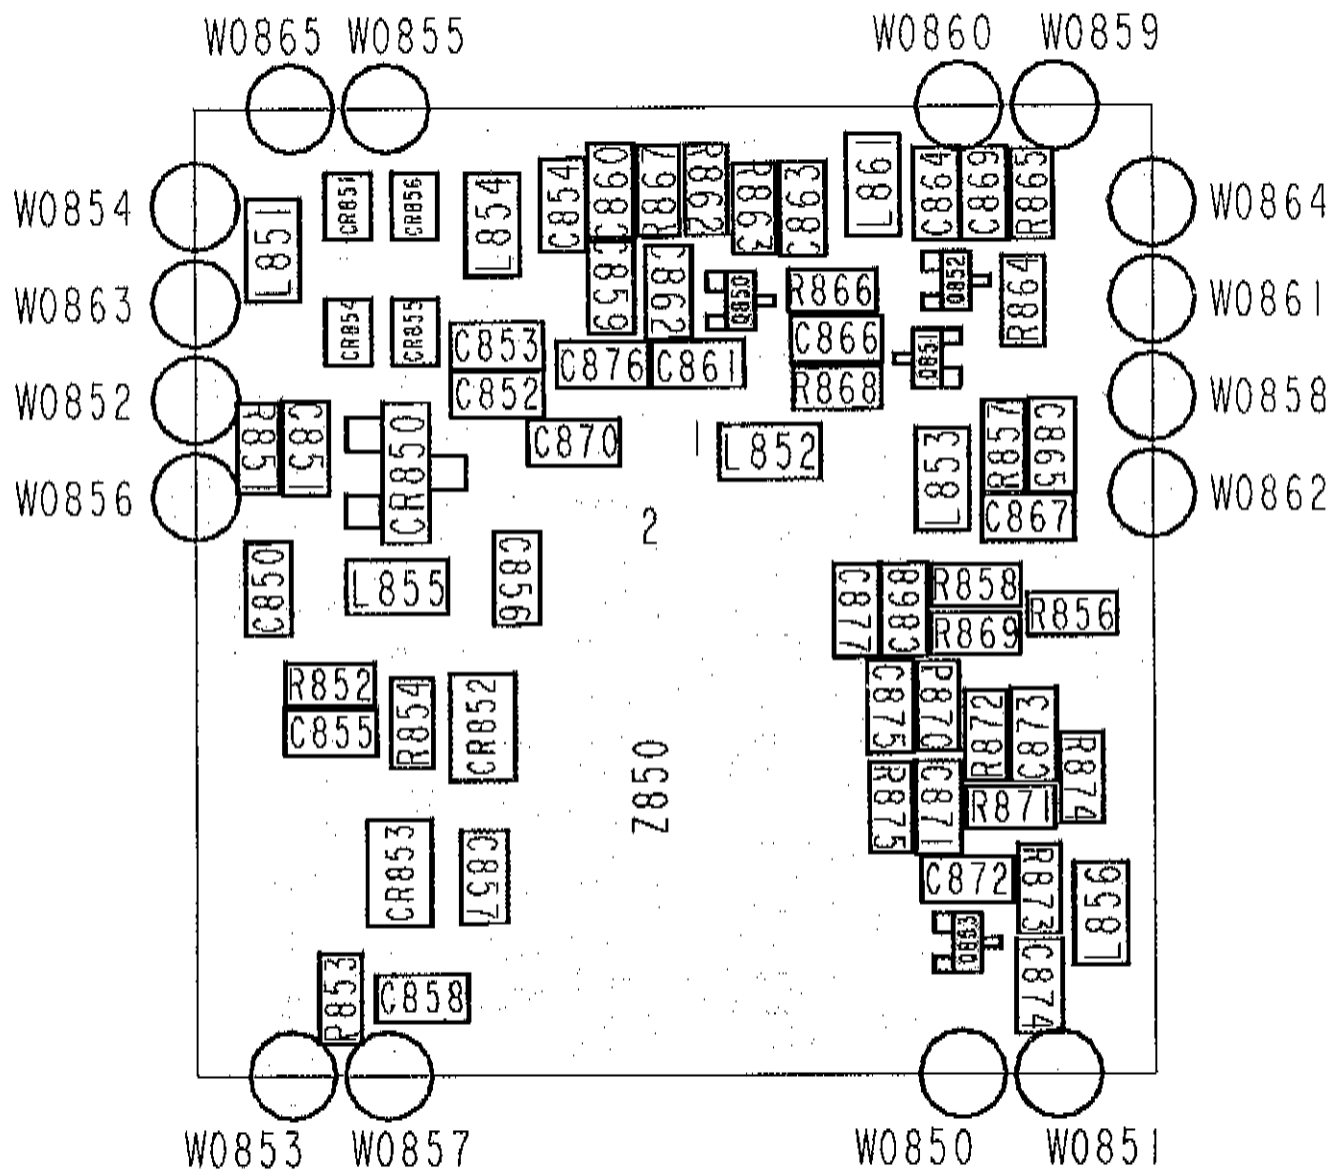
VCO COMPONENT LAYOUT (COMPONENT SIDE VIEW)
